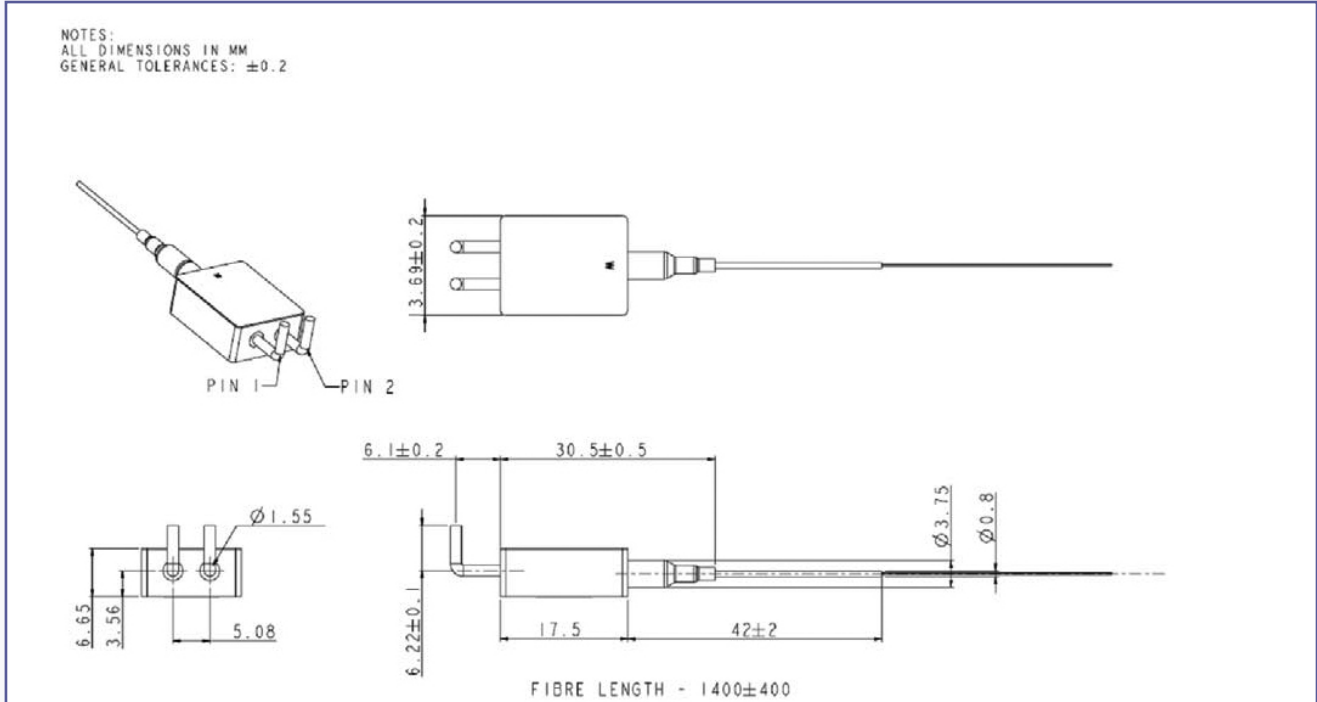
Package Outline Drawing and Dimensions (mm) for BMUT*-*-02-B-R Product.
